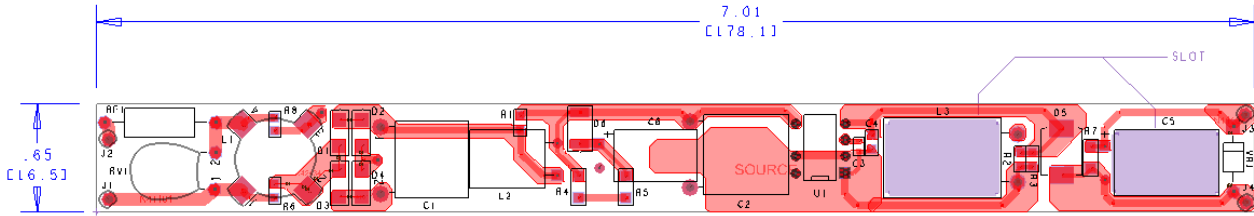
Printed Circuit Layout for DIP-8 P Package.Top View.
